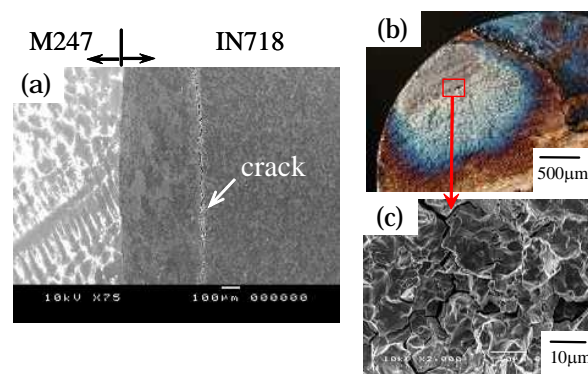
Fracture behavior of the DFW joint under the tension hold LCF test, showing (a) Overview of fracture surface, (b) Intergranular fracture surface, (c) predominant cracking at the HAZ.
